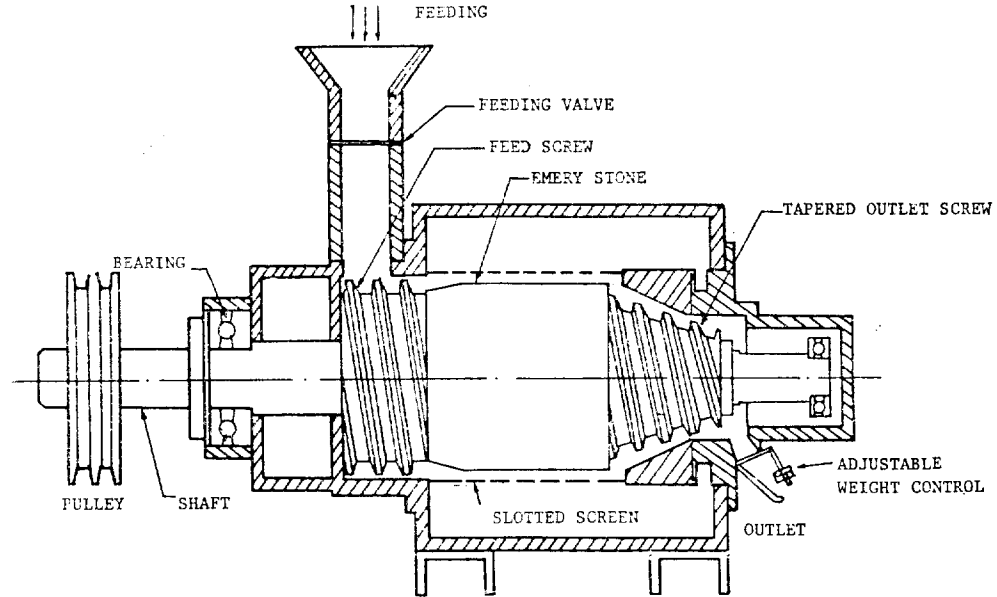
Schematic drawing of abrasive type whitening machine used for experiment
